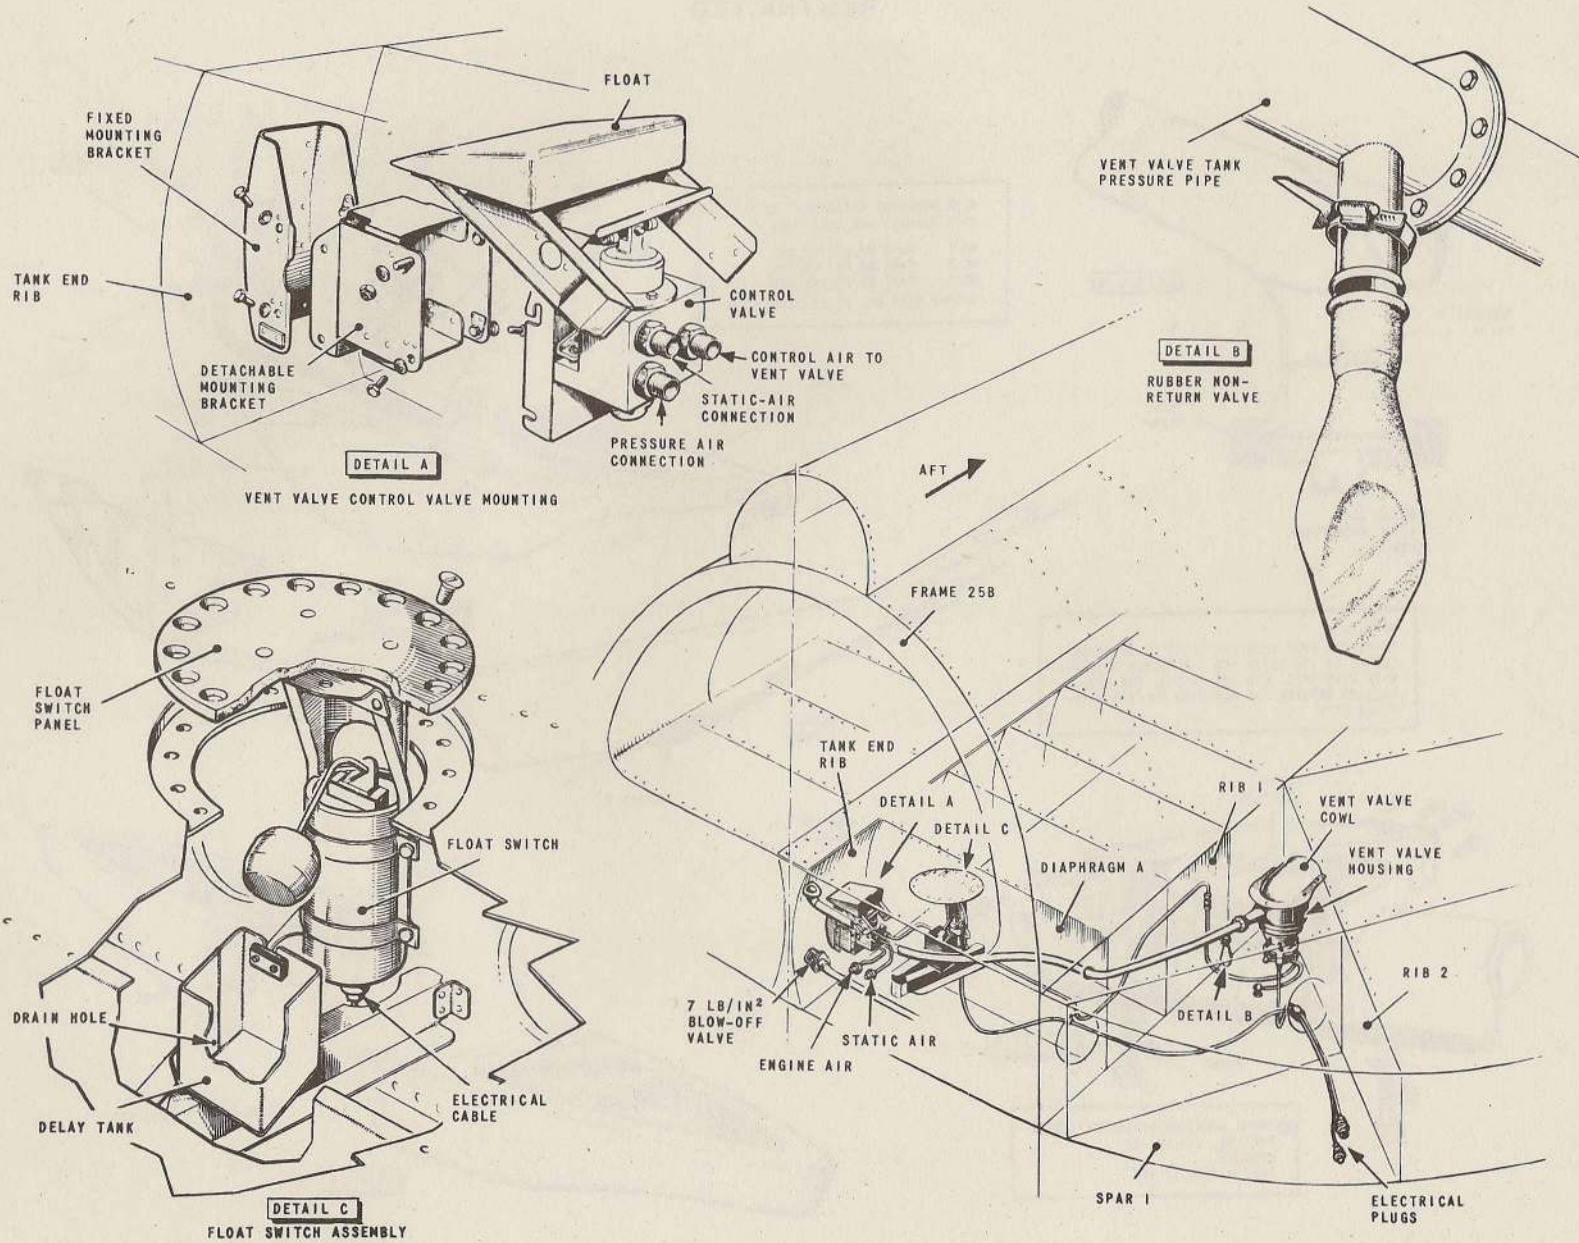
COMPONENTS - MAIN - PLANE TANK - INBOARD
